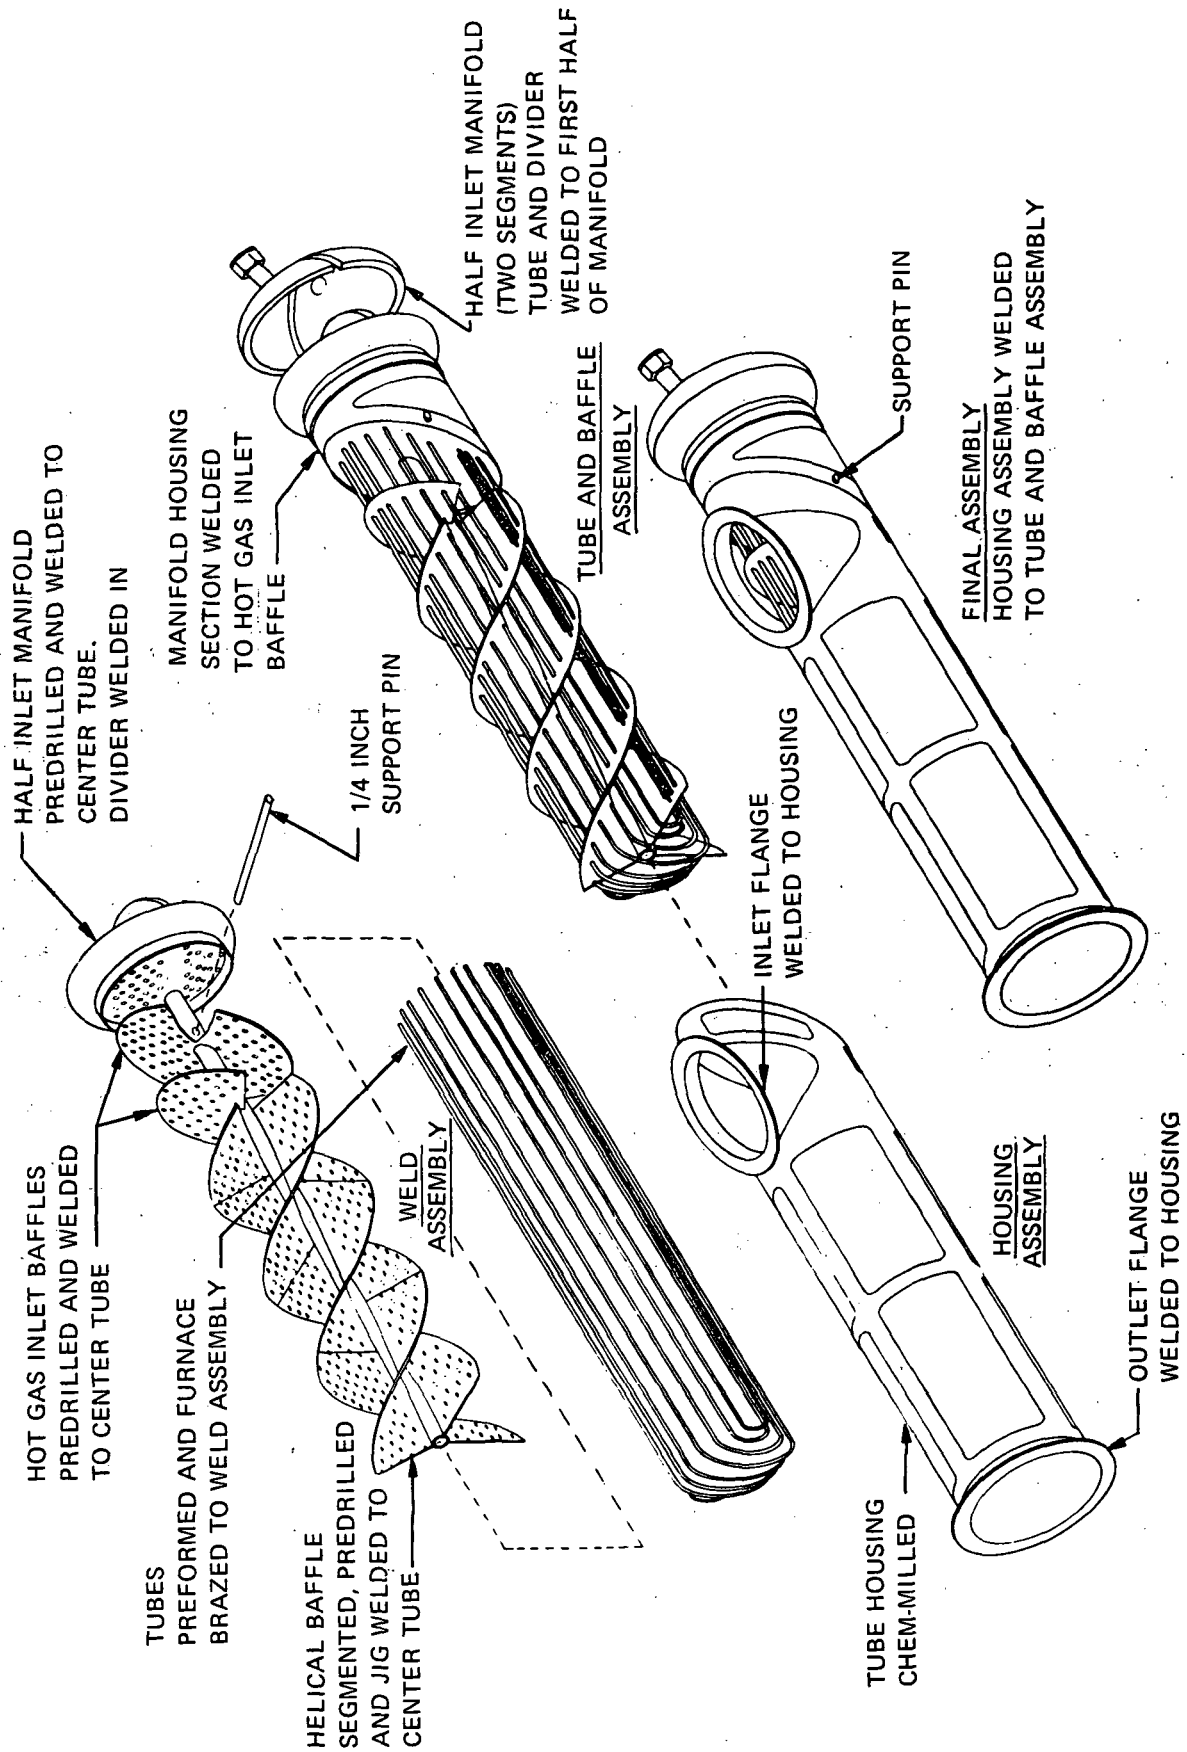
Assembly Sequence, U-Tube Heat Exchanger
